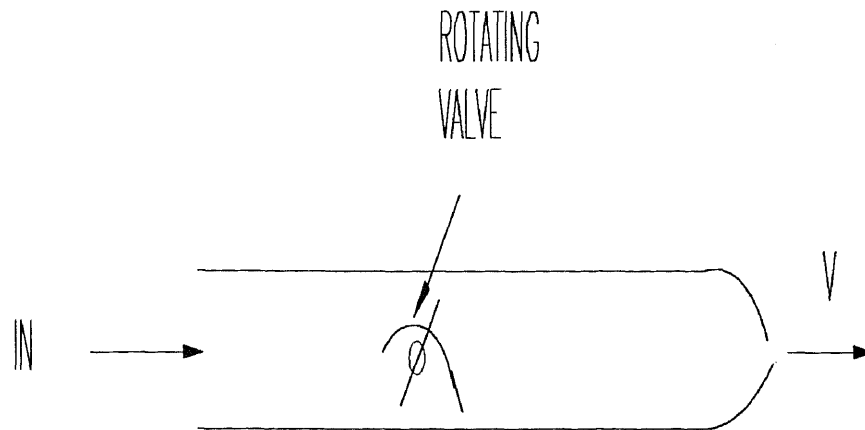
WJ Nozzle with a Oscillating Mechanical Valve
